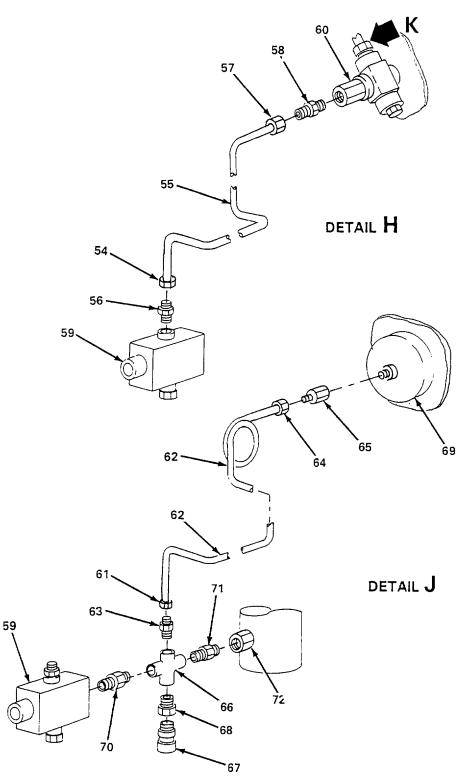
Lines and Fittings, Removal (Sheet 5 of 6).
